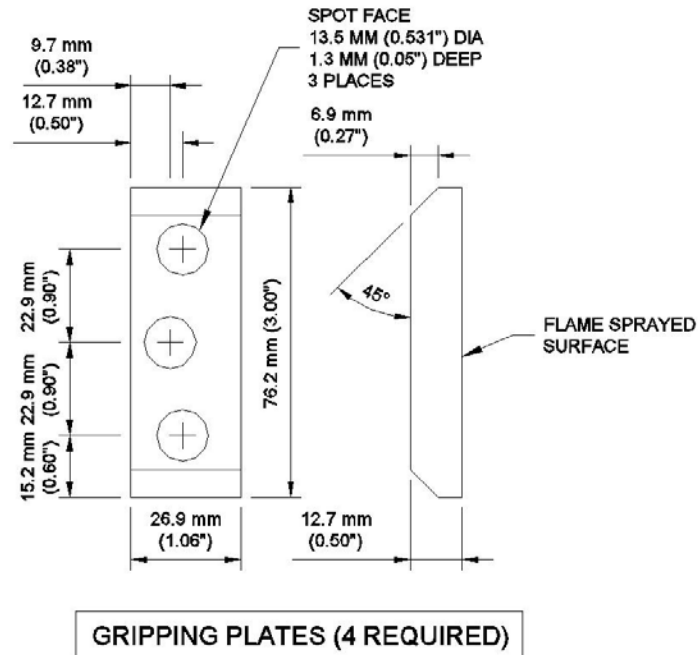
NEW TWO-RAIL SHEAR TEST FIXTURE GRIPPING PLATES
